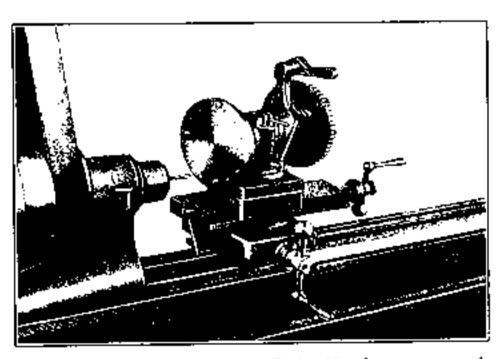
Milling Attachment Index Head on compound slide rest, drilling equally spaced holes at an angle
